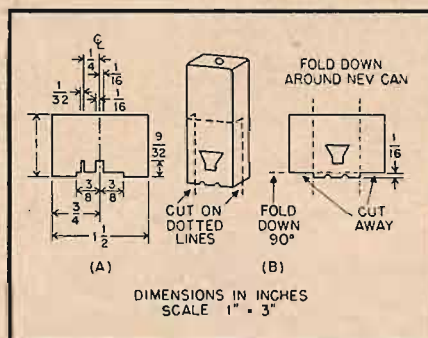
The text tells how to use these drawings to make templates for modifying coil cans for the  $\frac{1}{8}$ -in. chassis.
